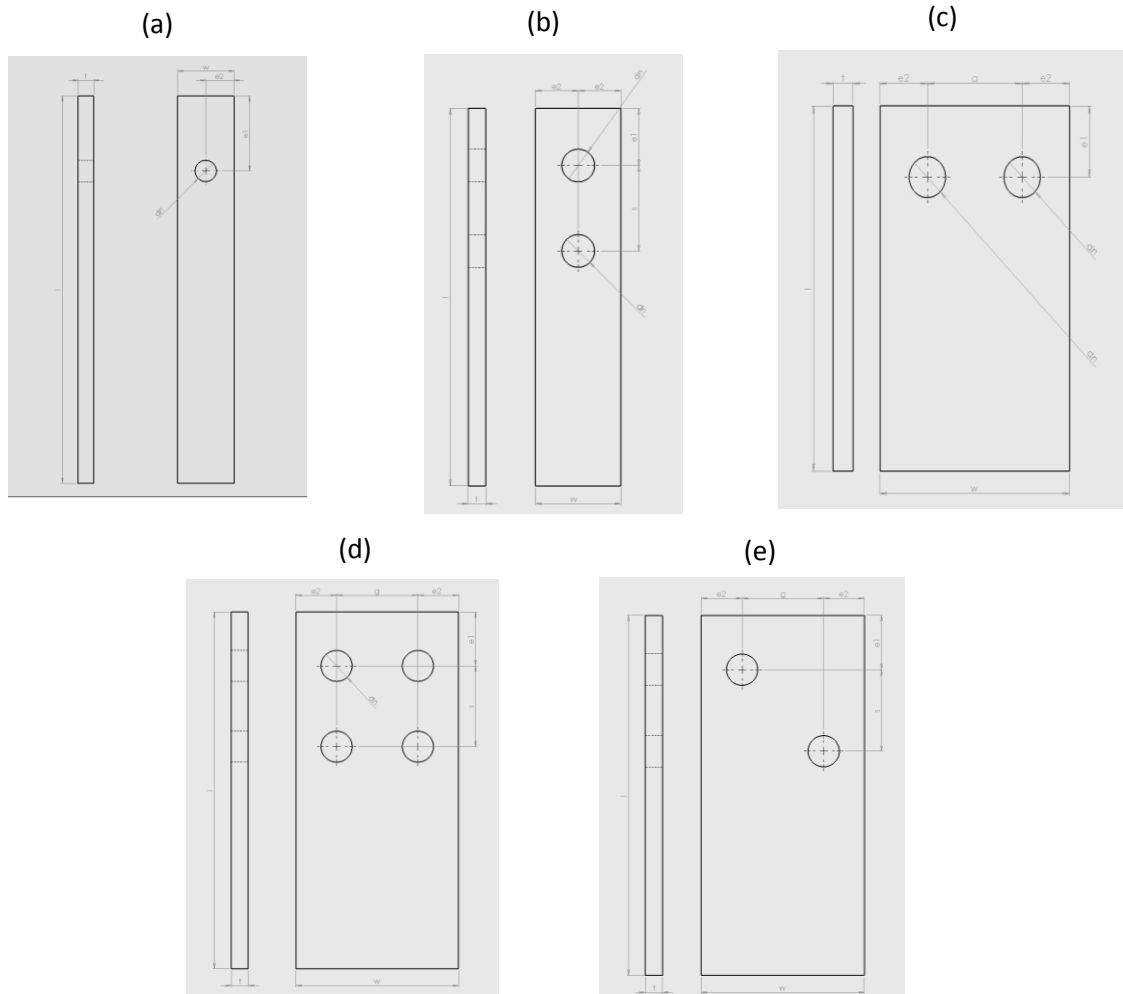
Schematic and Major Dimensions of Bolting Arrangements (A) to (E) with (a) Single Bolt, (b) Two Bolts in a Column, (c) Two Bolts in a Row, (d) Four Bolts (2 x 2) and (e) Two Staggered Bolts
